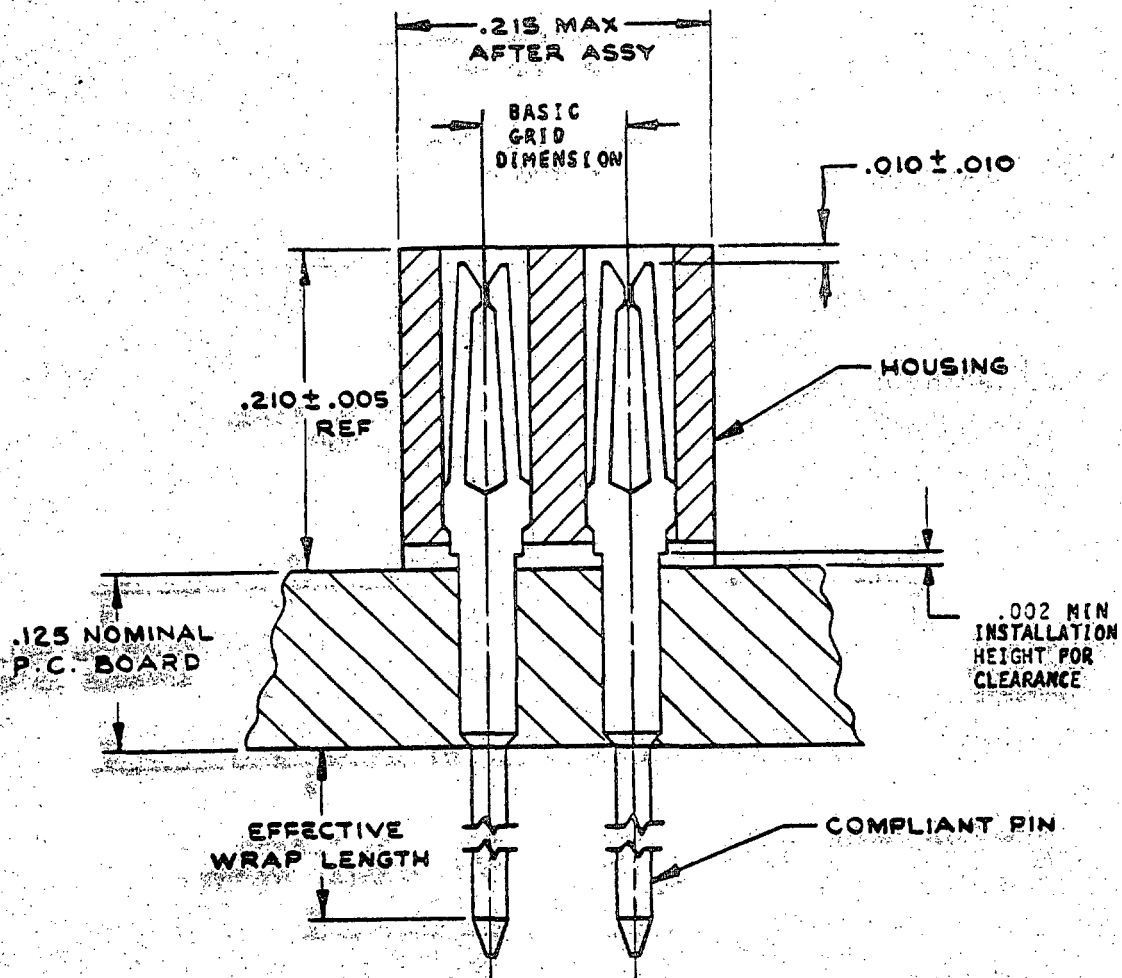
Cross-sectional view of printed-wiring electrical backplane assembly.
